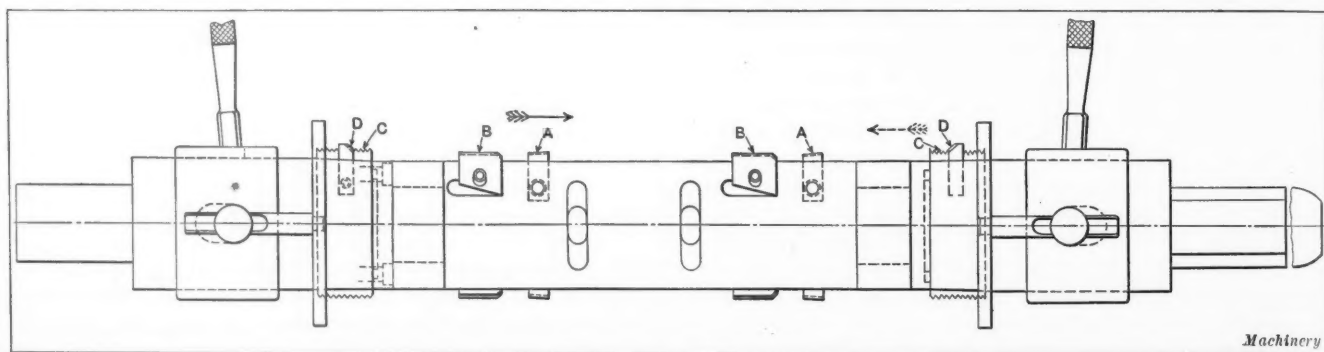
Detail View of Combination Tool shown in Fig. 1
